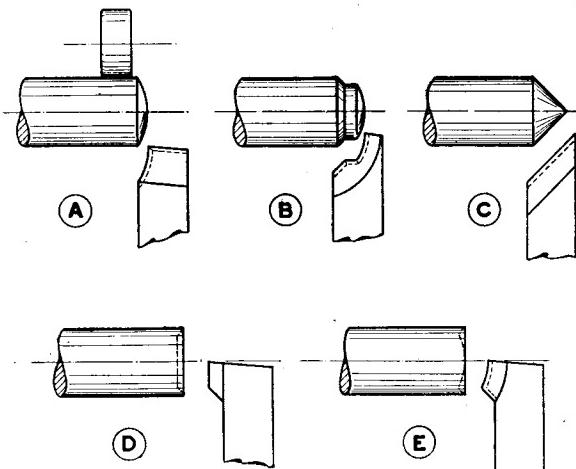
Various types of "ending" tools used for finishing the end faces of bolts and similar components.
